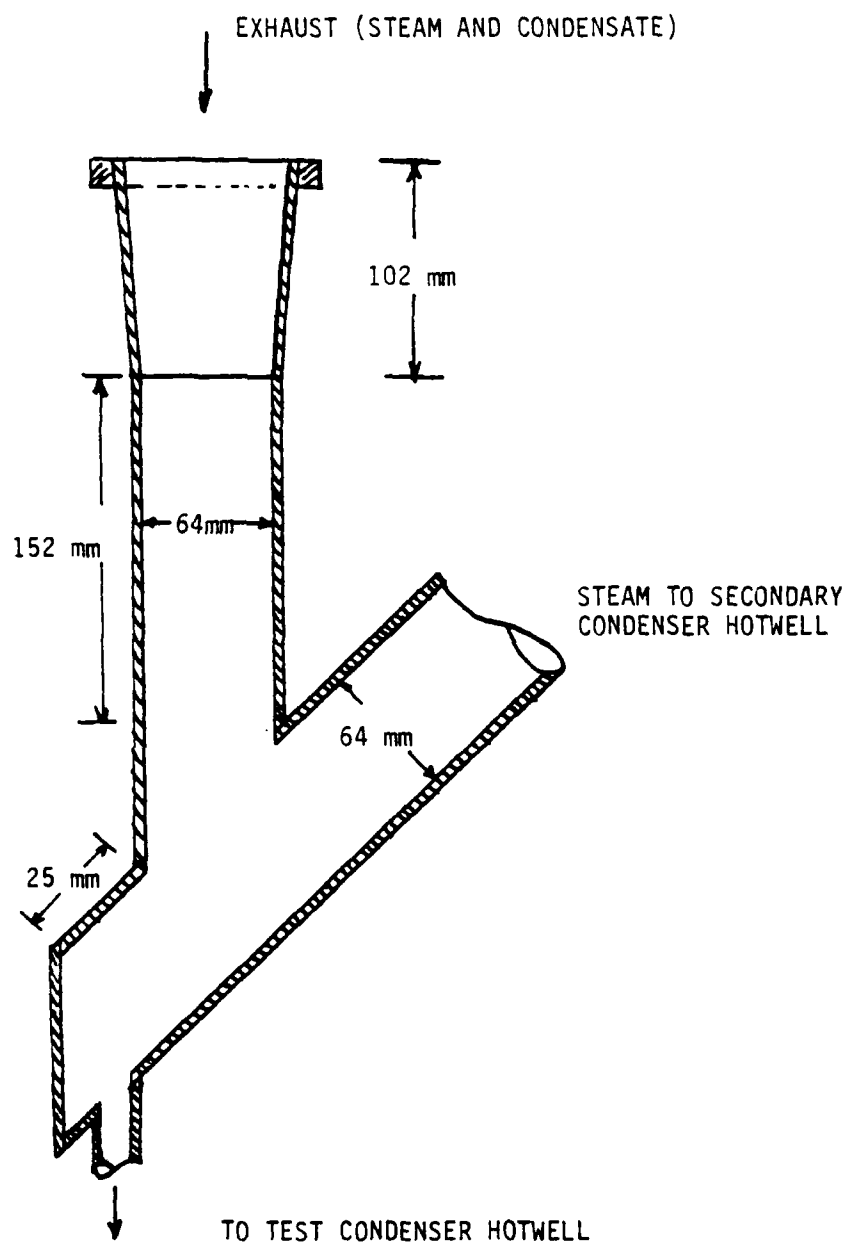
Details of Exhaust and Condensate Piping from the Exhaust Plenum
